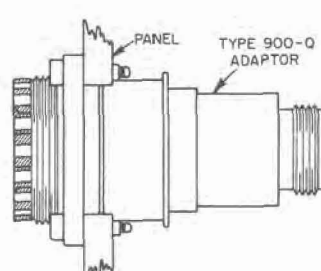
Panel connector mounted with a Type 900-Q Adaptor.
